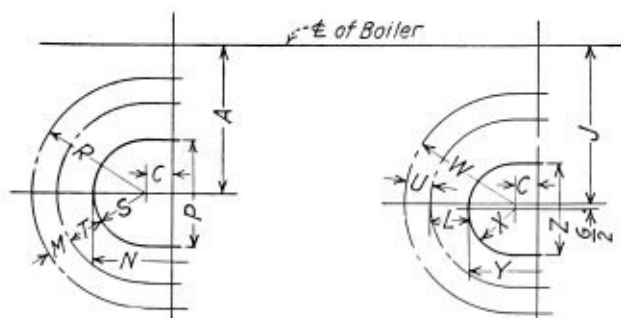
Method of finding backhead bend line for a straight flange radius
